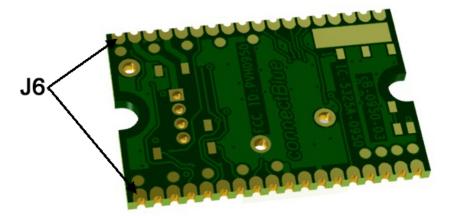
The solder pads J6 are available on the long edges of the bottom side of the PCB.
